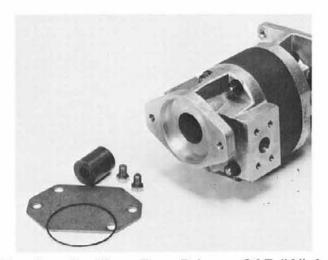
Auxiliary Rear Drive -- SAE "A" & "B" Pads
